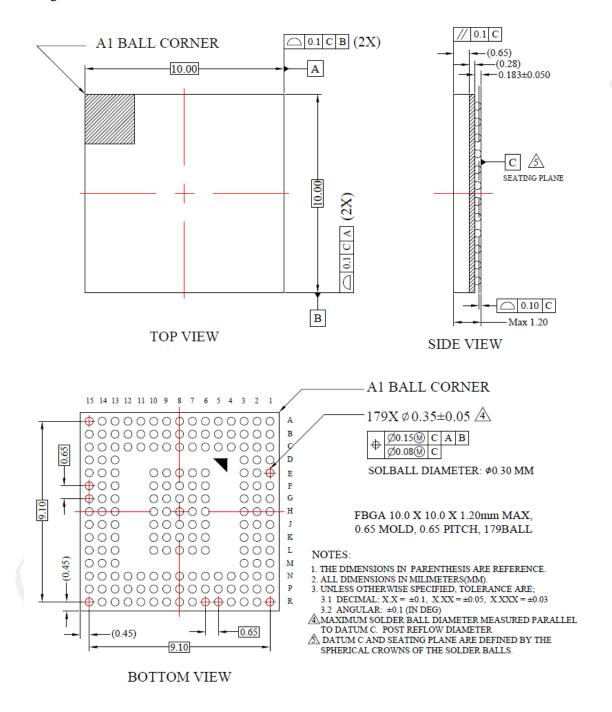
PAIOS<sup>2</sup>-AD Package Dimension
